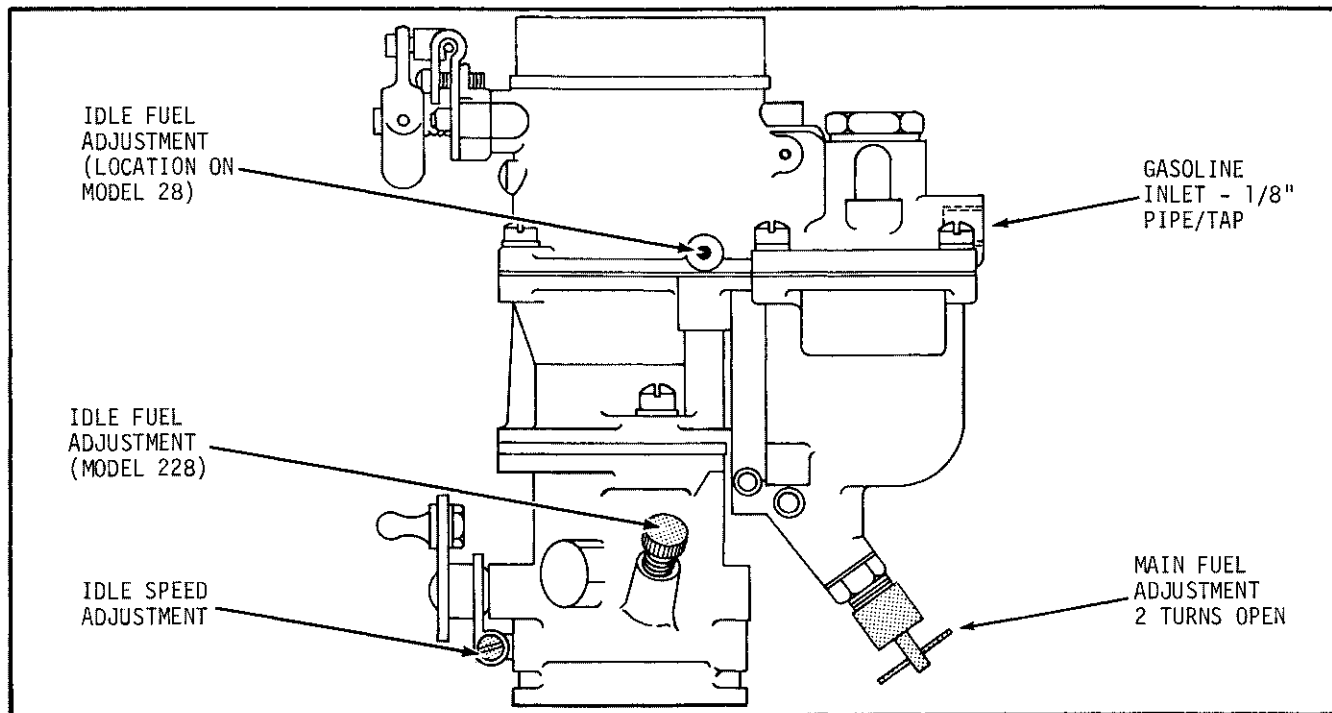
ADJUSTMENTS, DOWNDRAFT CARBURETOR MODELS 28 AND 228, K662 ENGINES
